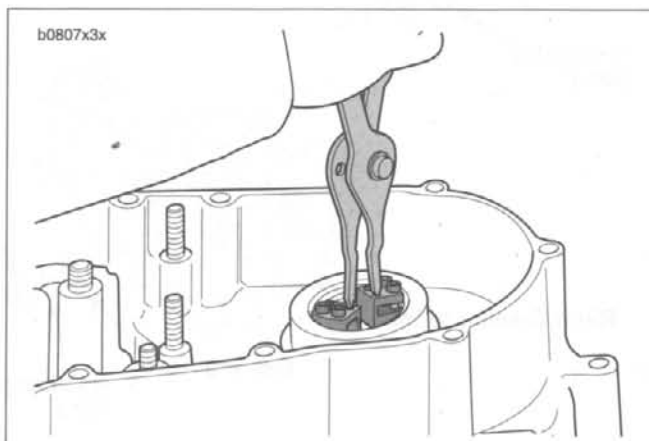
Remove Snap-Ring From Crankcase Bore
